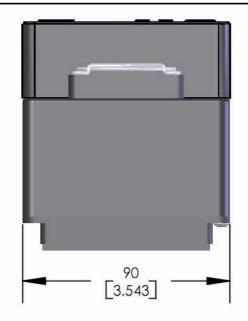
Standard Body (Type A) with Rectangular Flange (Type A) - Top View
